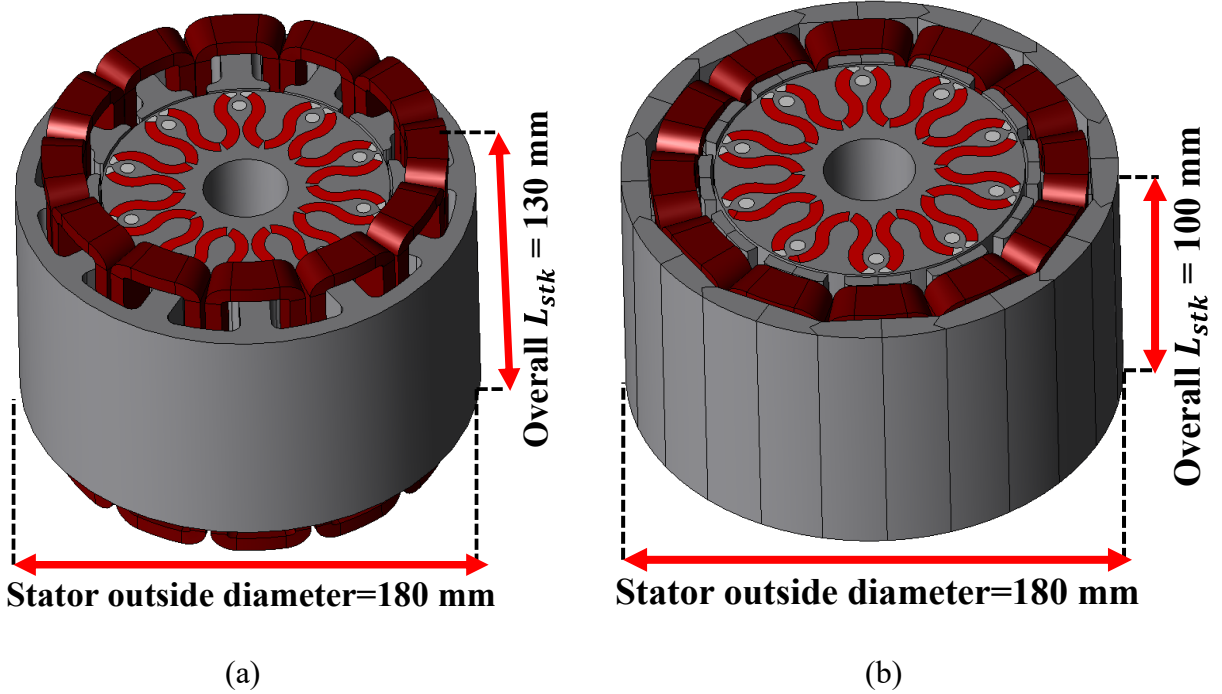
16. (a) Laminated stator with end winding (b) SMC stator with encapsulated end winding
